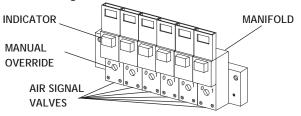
Air Signal Valve Manifold Assembly (Radius-style manifold shown)
